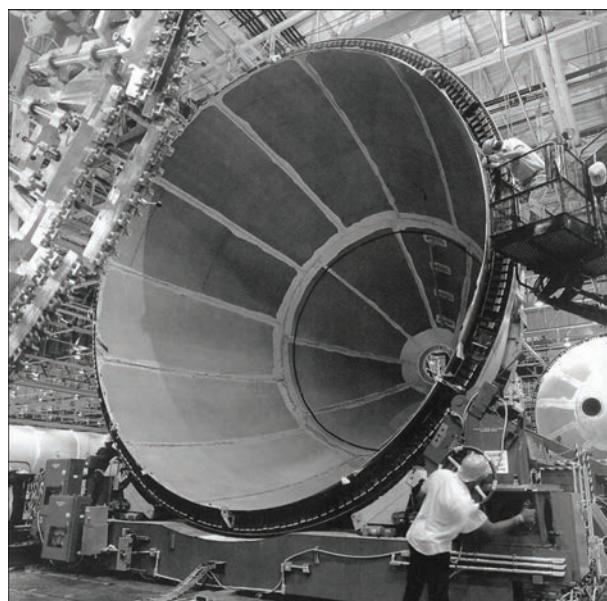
Welding of the dome of external fuel tank of Space Shuttle vehicle (USA)
